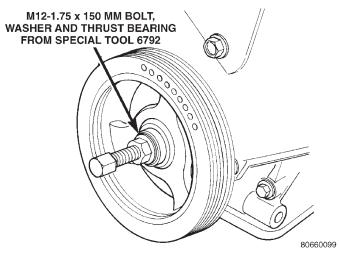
Crankshaft Damper—Installation CRANKSHAFT OIL SEAL—REAR
